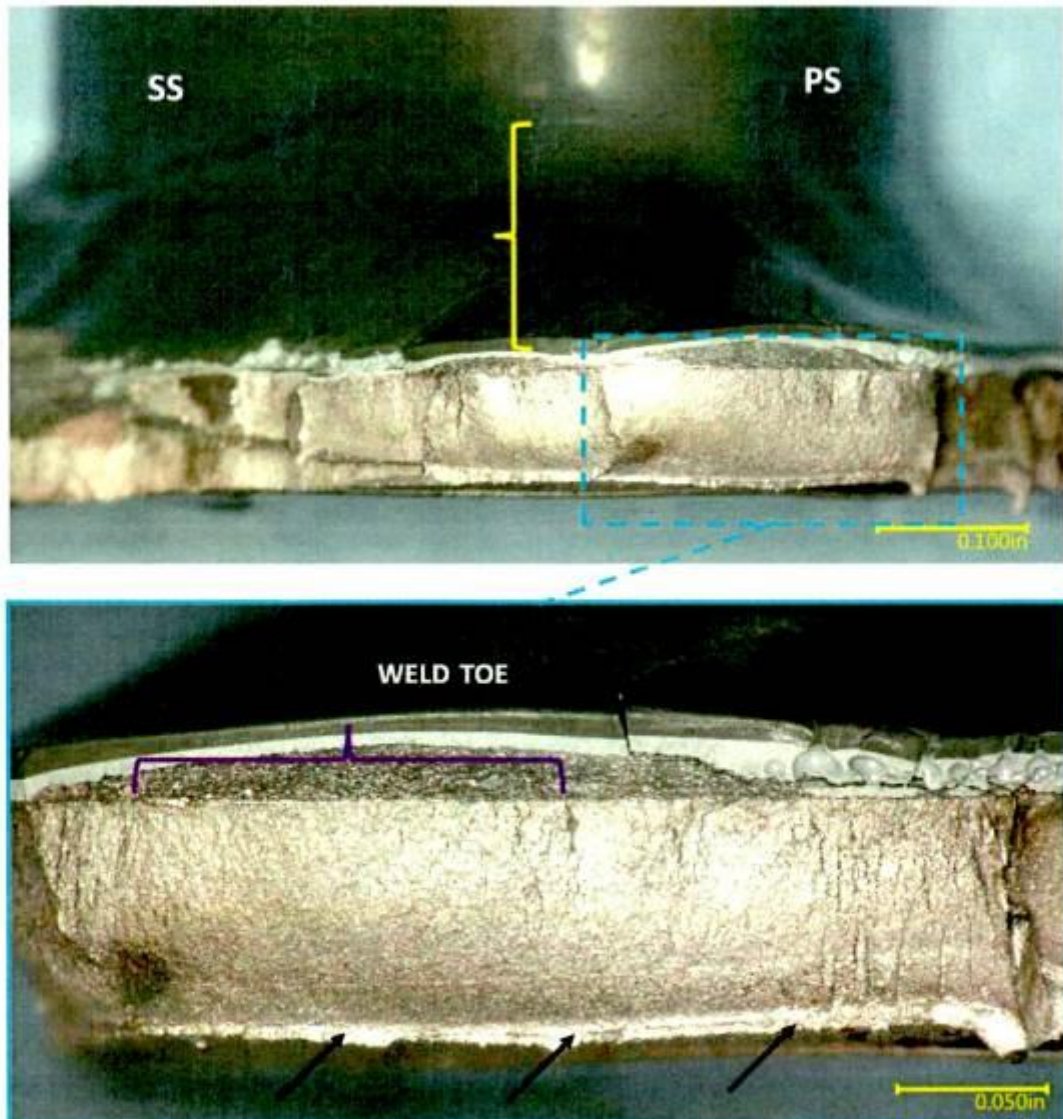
Digital microscope images showing the cleaned fracture surface on the blade. The yellow bracket indicates the weld on the blade. The purple bracket indicates a diffuse fatigue cracking initiation region, while the black arrows point to a shear lip.
